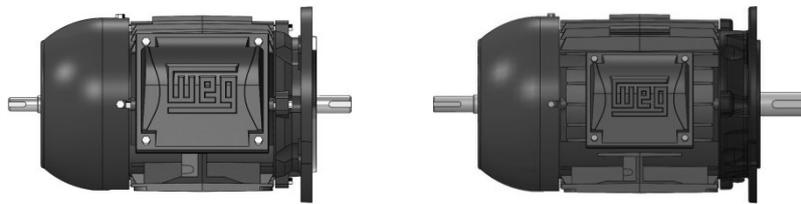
Three-dimensional assembly of CVM and addition of a BPM.
